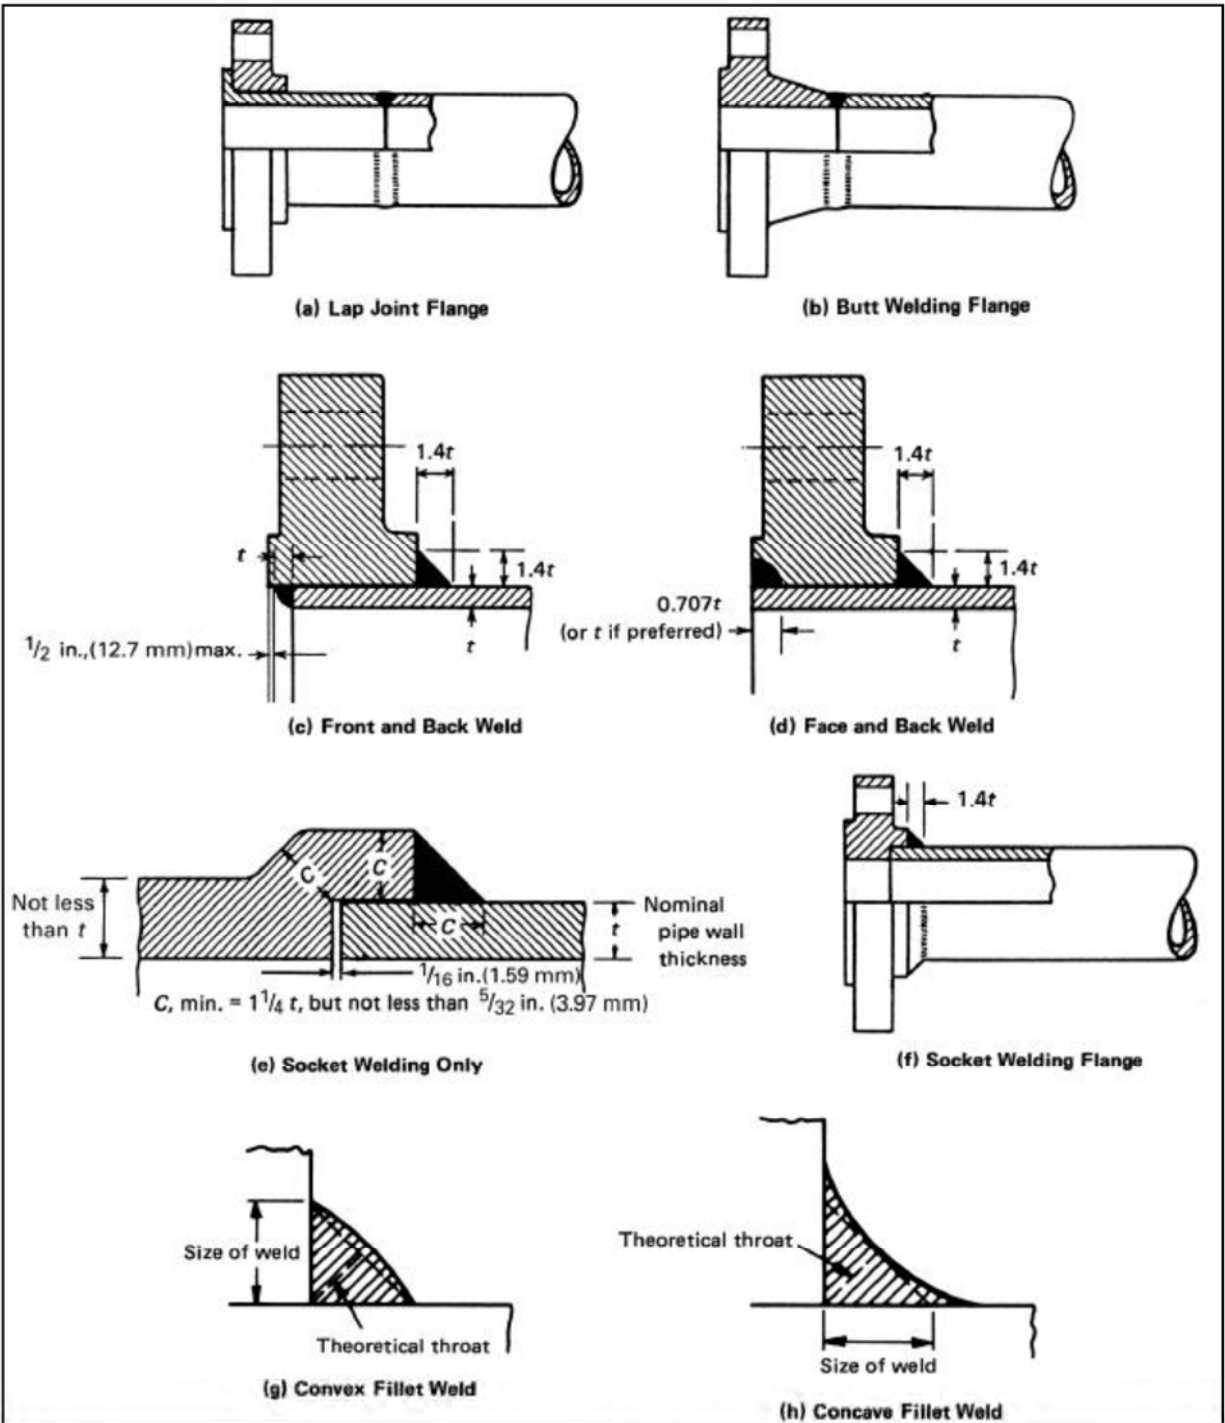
Recommended Attachment Details for Flanges and Socket Welds
